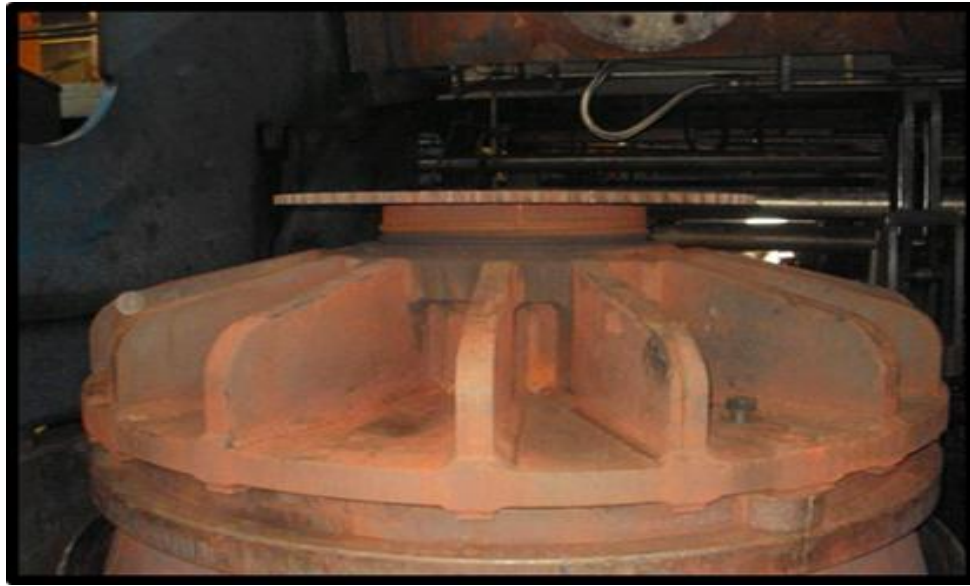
Stripped platen mould adjuster mounted on the prismatic container
